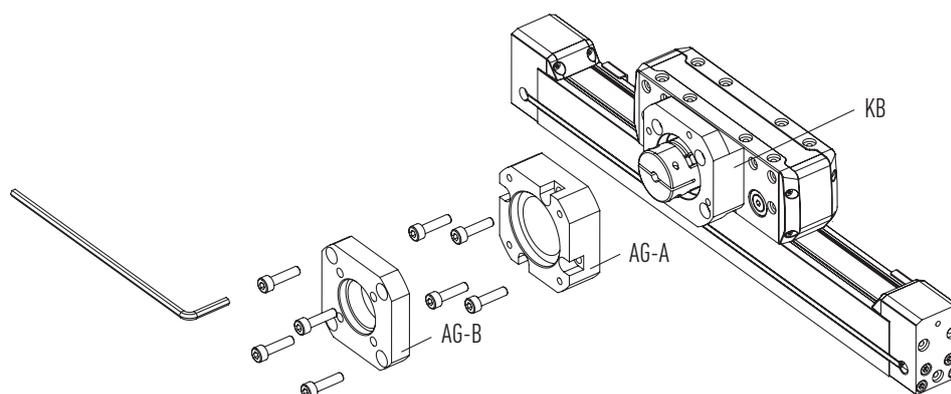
Mounting the two-part gear adapter plate AG-A and AG-B – HC025B, HC040B
